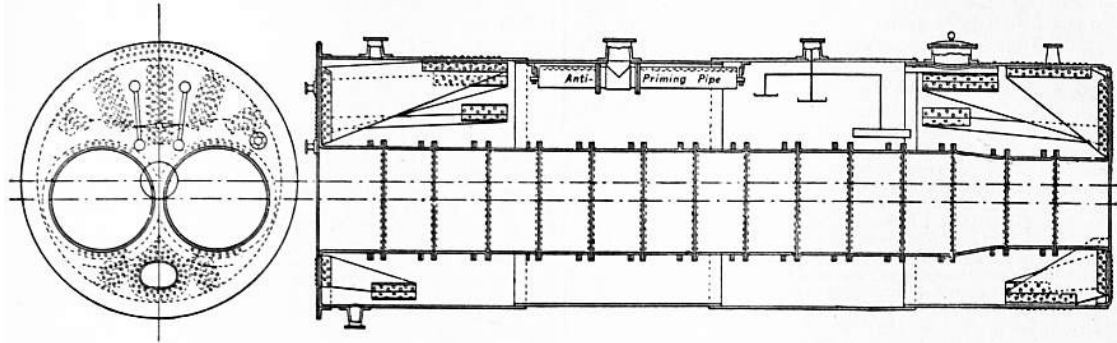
Lancashire Boiler (Messrs Tinker, Ltd.).
